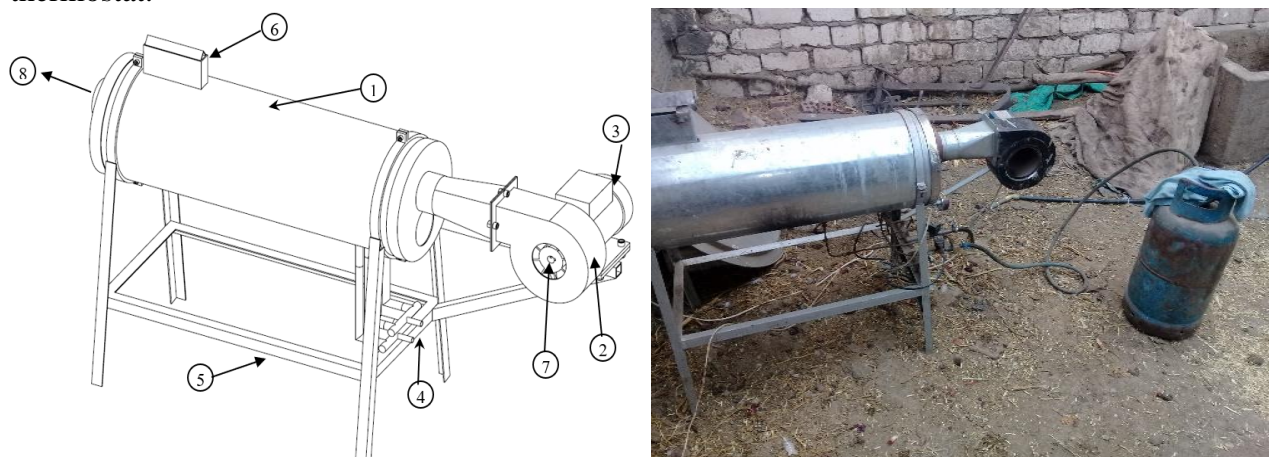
Thermal unit parts: 1- insulated galvanized cylinder, 2- air blower, 3- electric motor, 4- gas burner, 5- frame, 6- chimney, 7- air inlet, and 8- hot air outlet.
